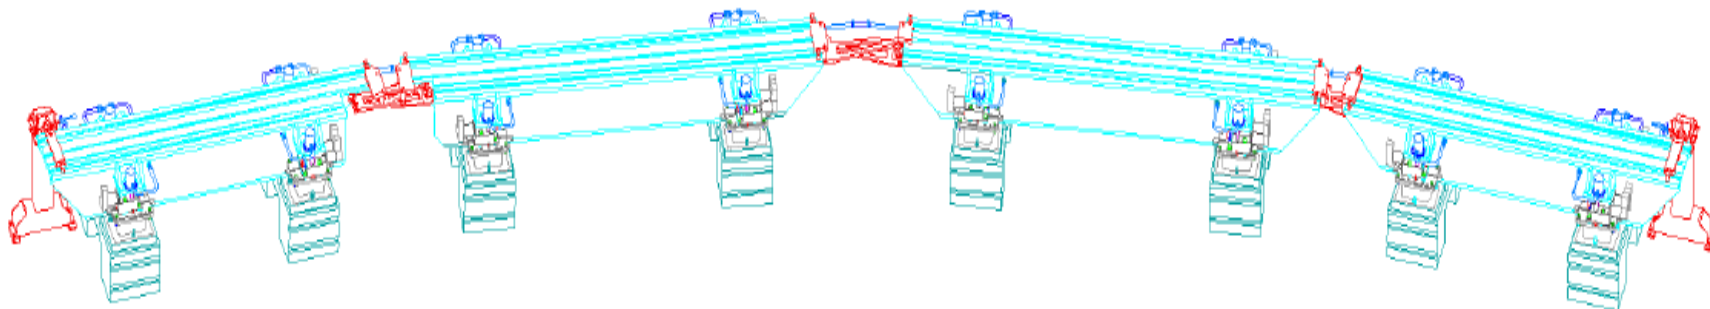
Four girders forming one sector. HPS sensors between adjacent girders and between end girders and sector terminating monuments are shown in red colour.
